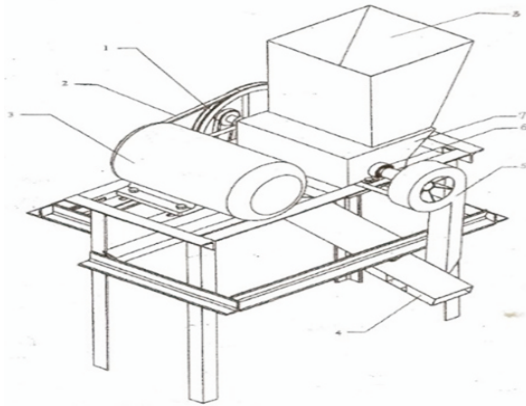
Developed Castor Fruits and Seeds Dehushing and Shelling Machine
